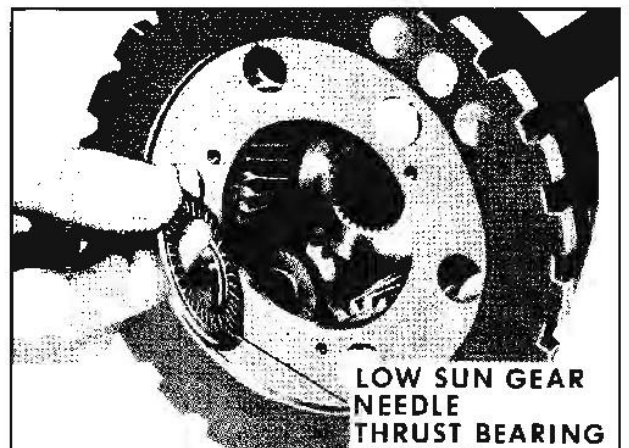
B-96 Installing Low Sun Gear Needle Thrust Bearing
